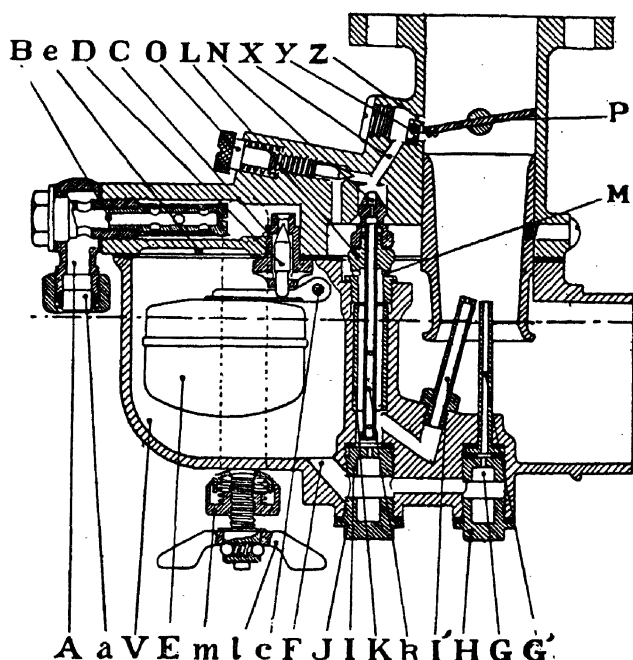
Showing principle of the Zenith U-Type Carburettor.
